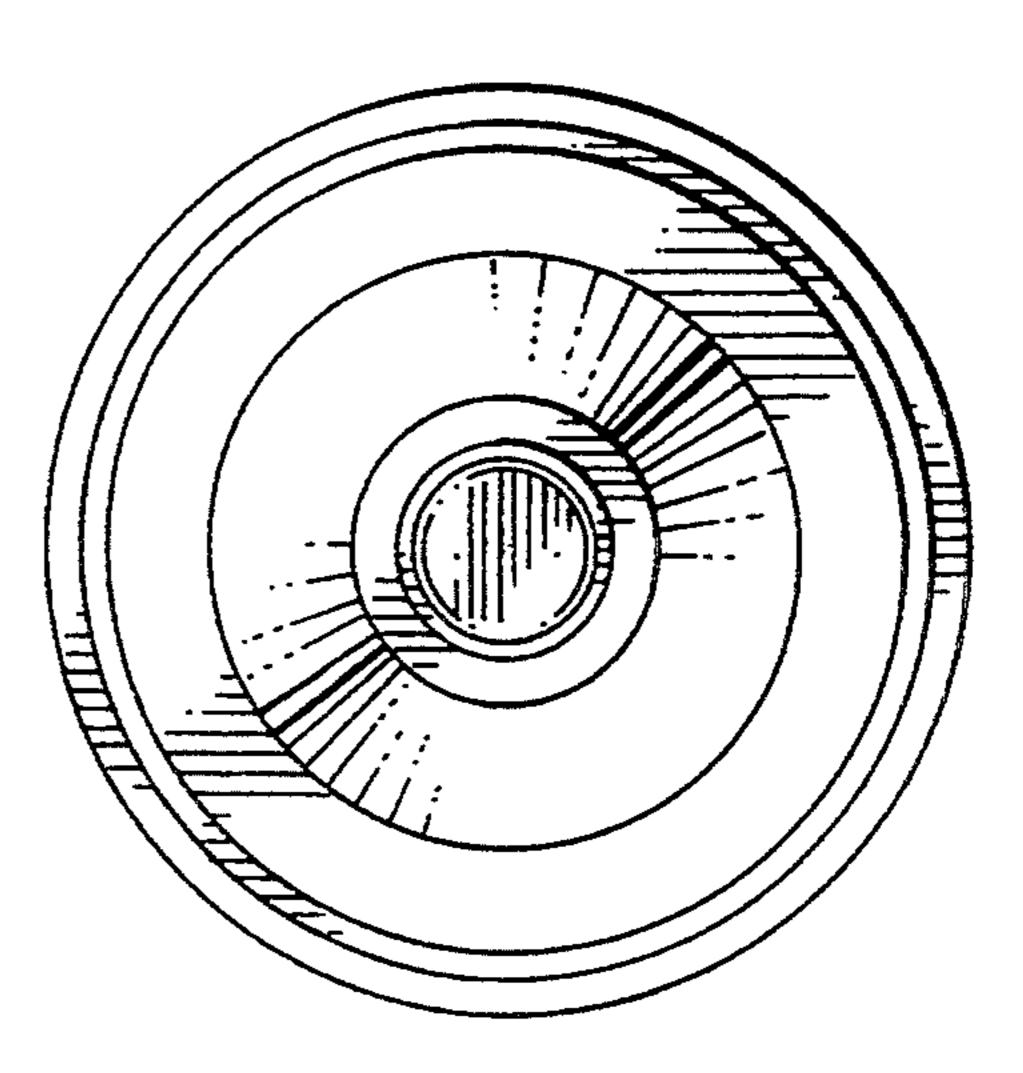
is a perspective view of the right side of the clamp bushing having an integrated conical mounting means of FIG. 1.
